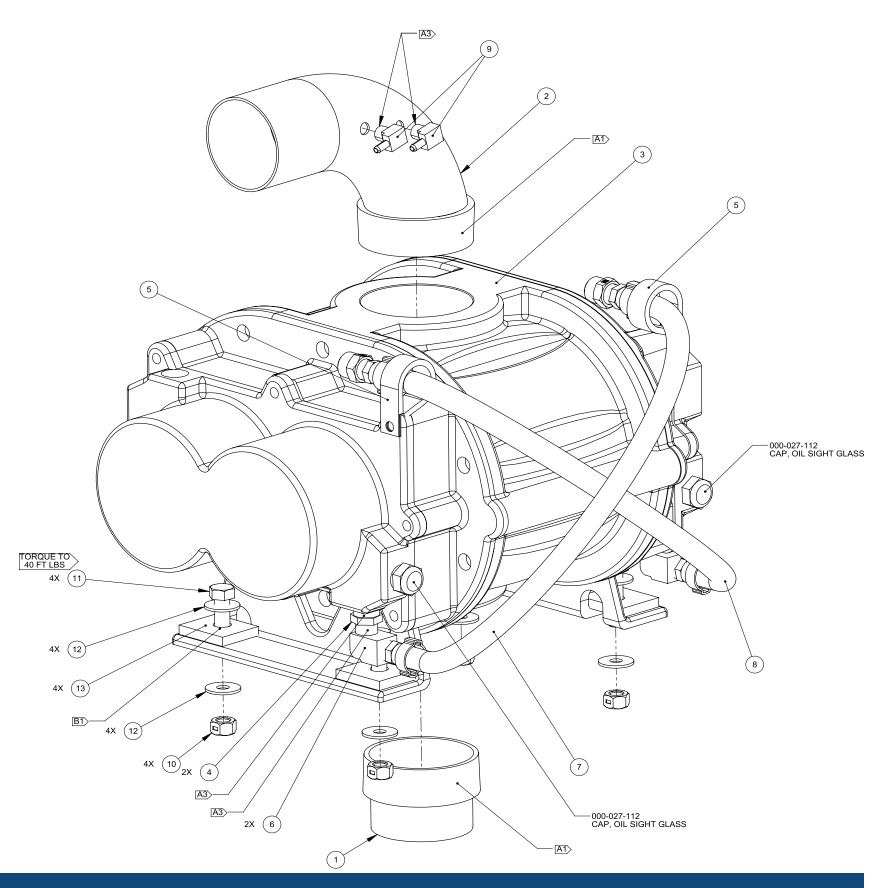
Blower Assembly - View 1 of 2 610-002-725 Rev. G
